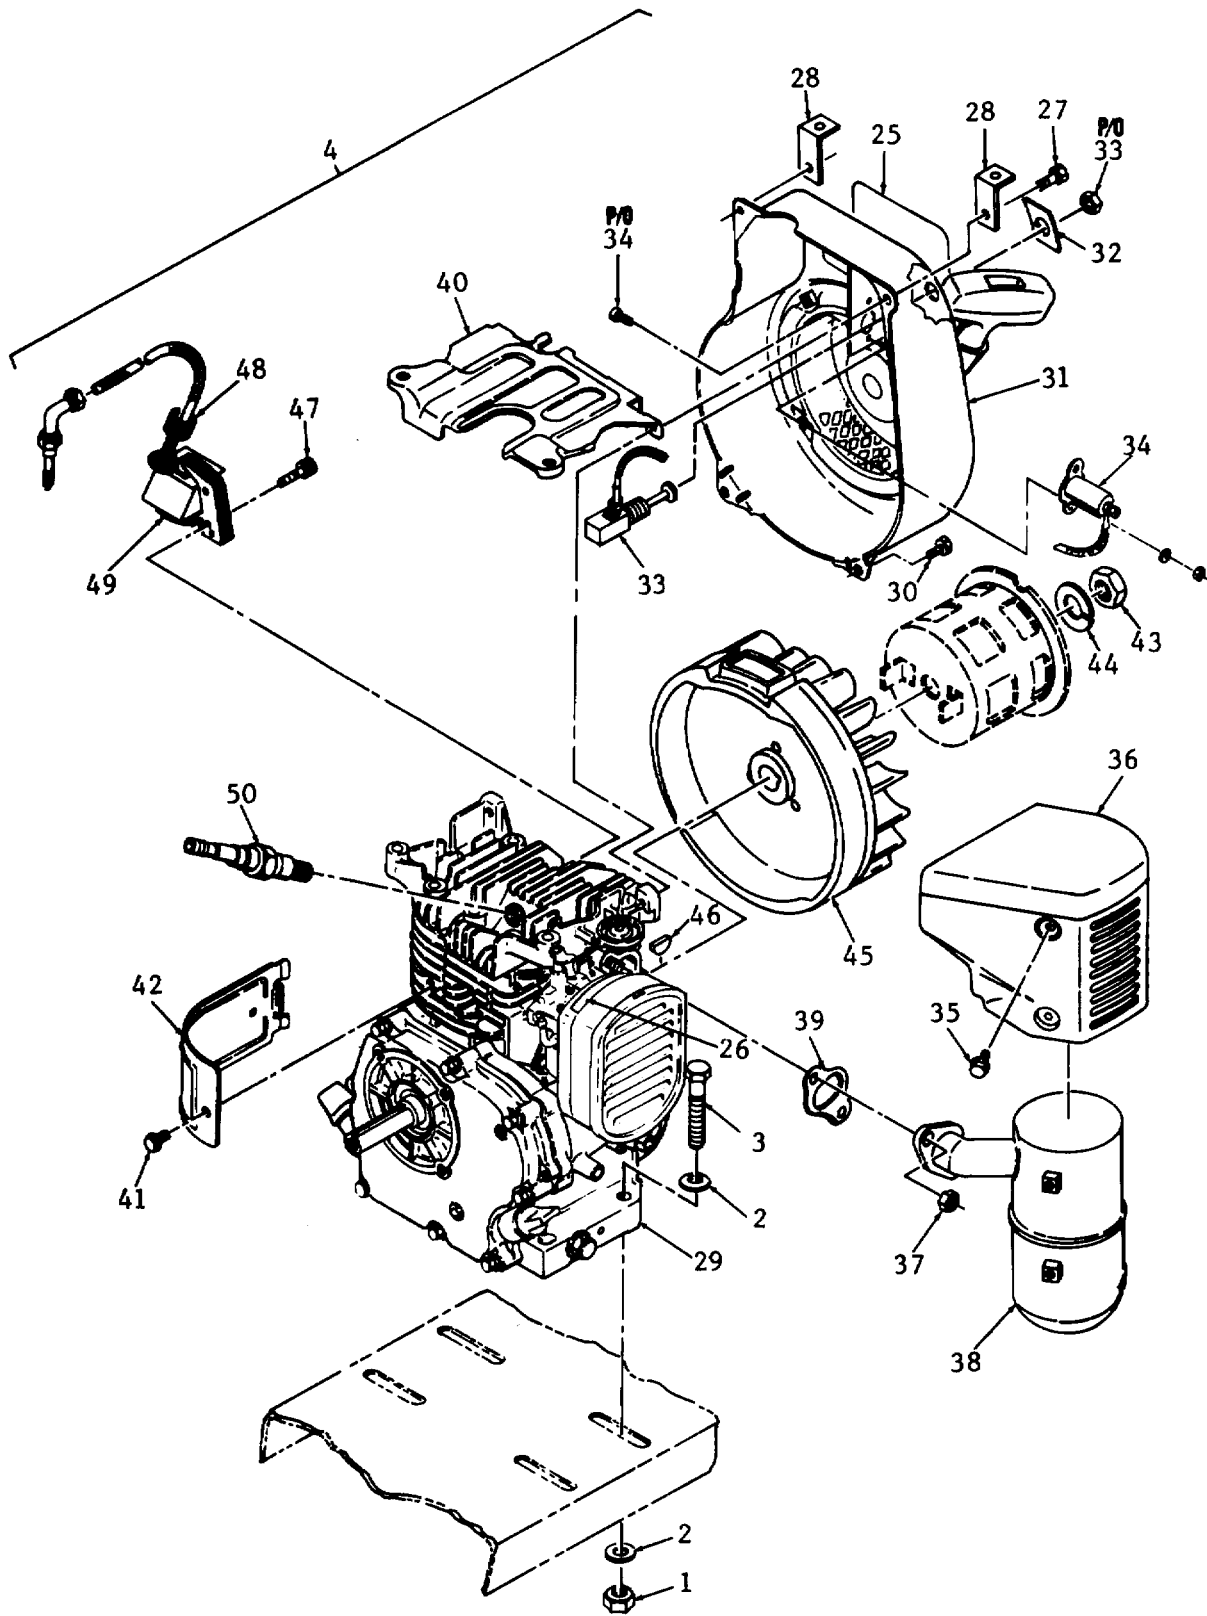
EMI Kit, Flywheel Shroud, and Flywheel
